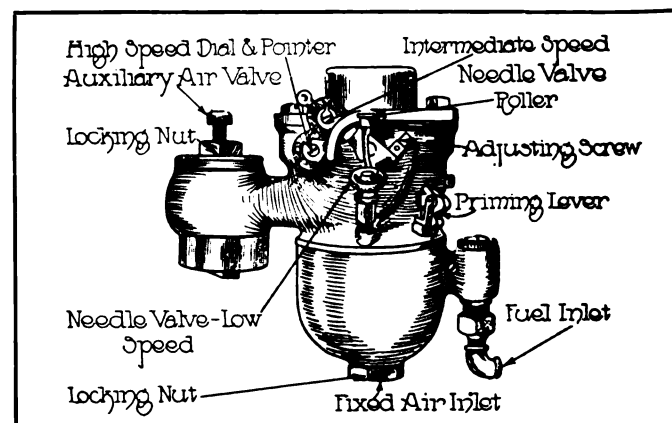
Components Utilized in Adjusting Model L Schebler Carburetor.
